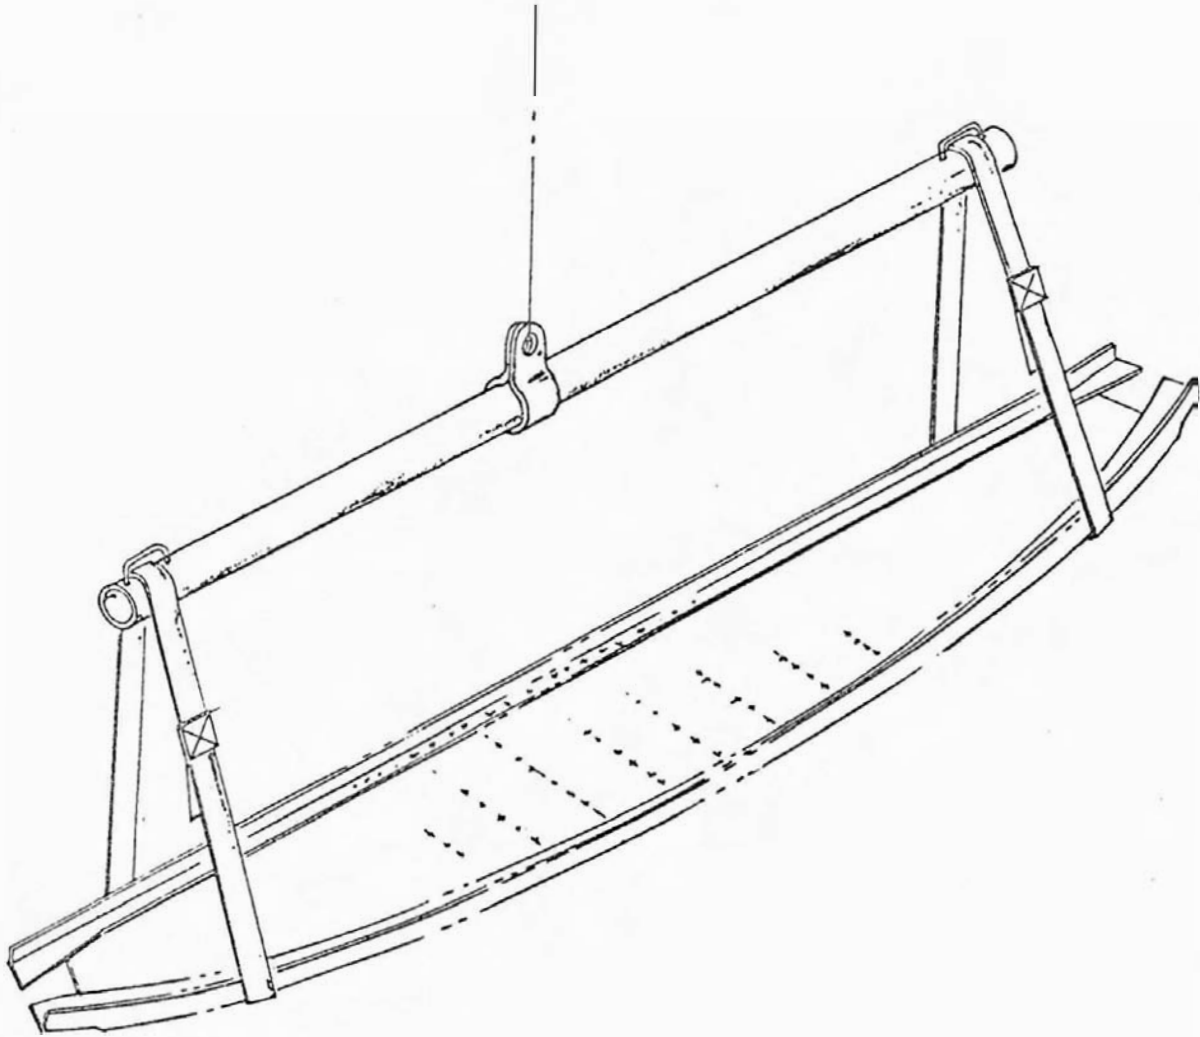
Intermediate Ring Assembly Hoisting Tool HT-370-19110
